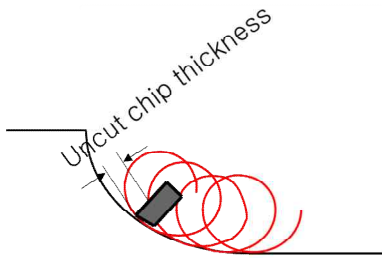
Locus of cutting edge in 2D-vibrational milling
